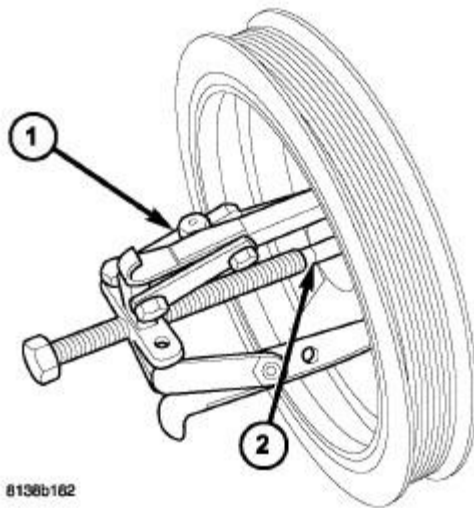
Puller 1023 & Crankshaft Insert 9020
